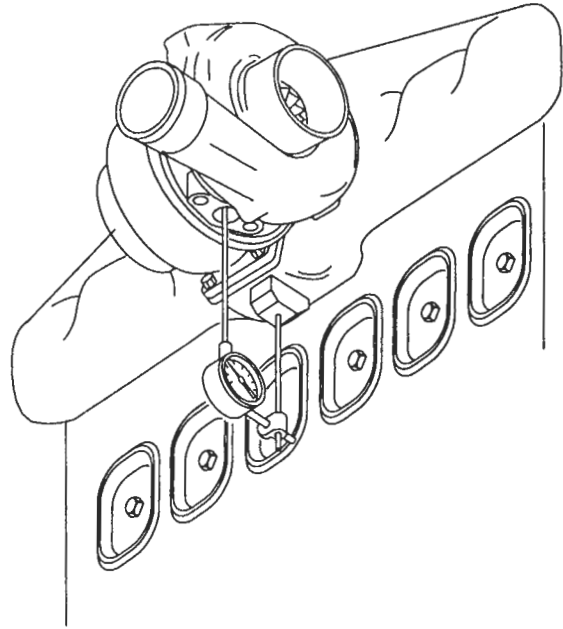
Indicator Mounting for Checking Shaft Radial Movement
